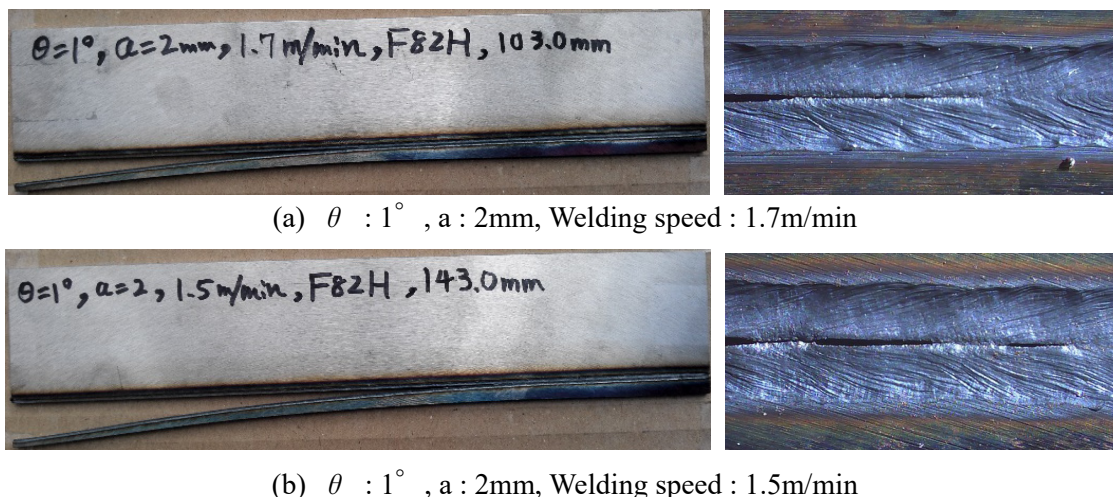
Surface appearance of weld bead in side-bead tested specimen
